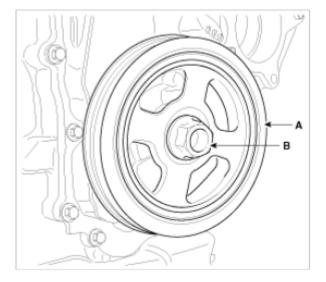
Identifying Crankshaft Pulley And Bolt Courtesy of HYUNDAI MOTOR AMERICA
